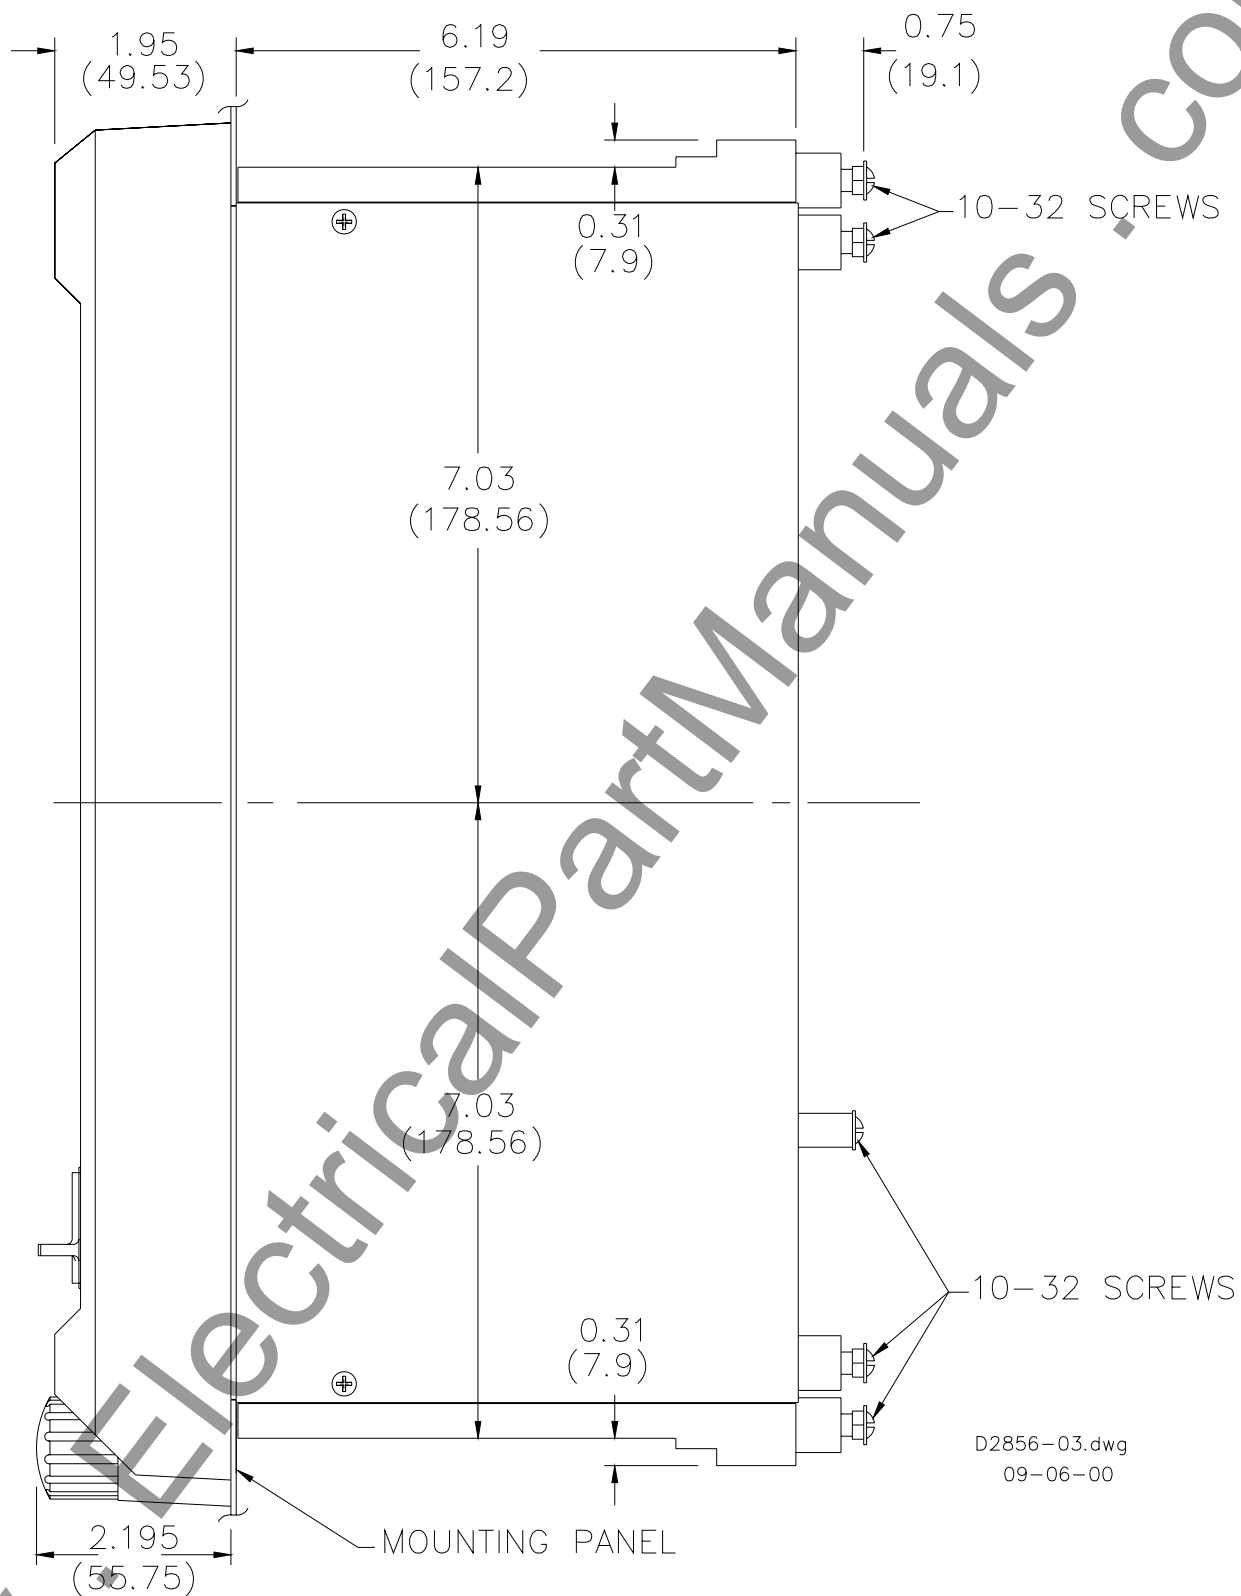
M1 Case Dimensions, Semi-Flush Mounting, Side View
